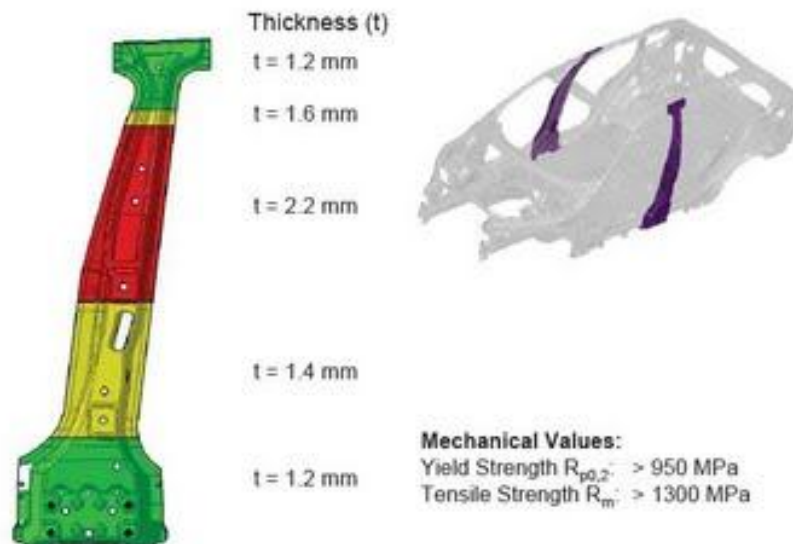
Tailor Welded Blank [2.7]
